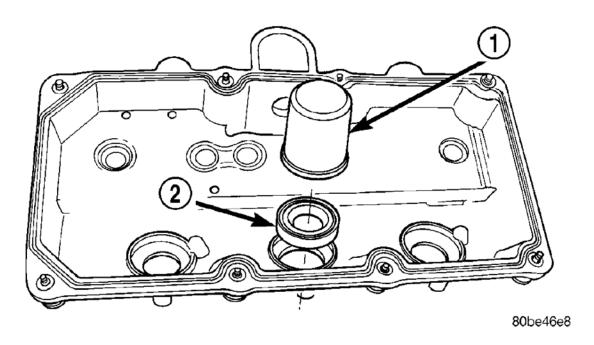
Installing Spark Plug Tube Seal Courtesy of CHRYSLER LLC
